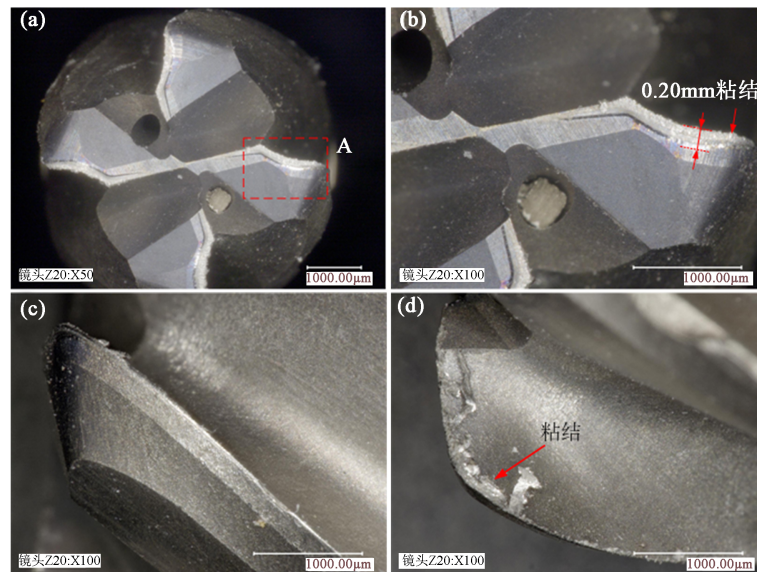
Tool wear morphologies after machining 24 holes without chip collector
